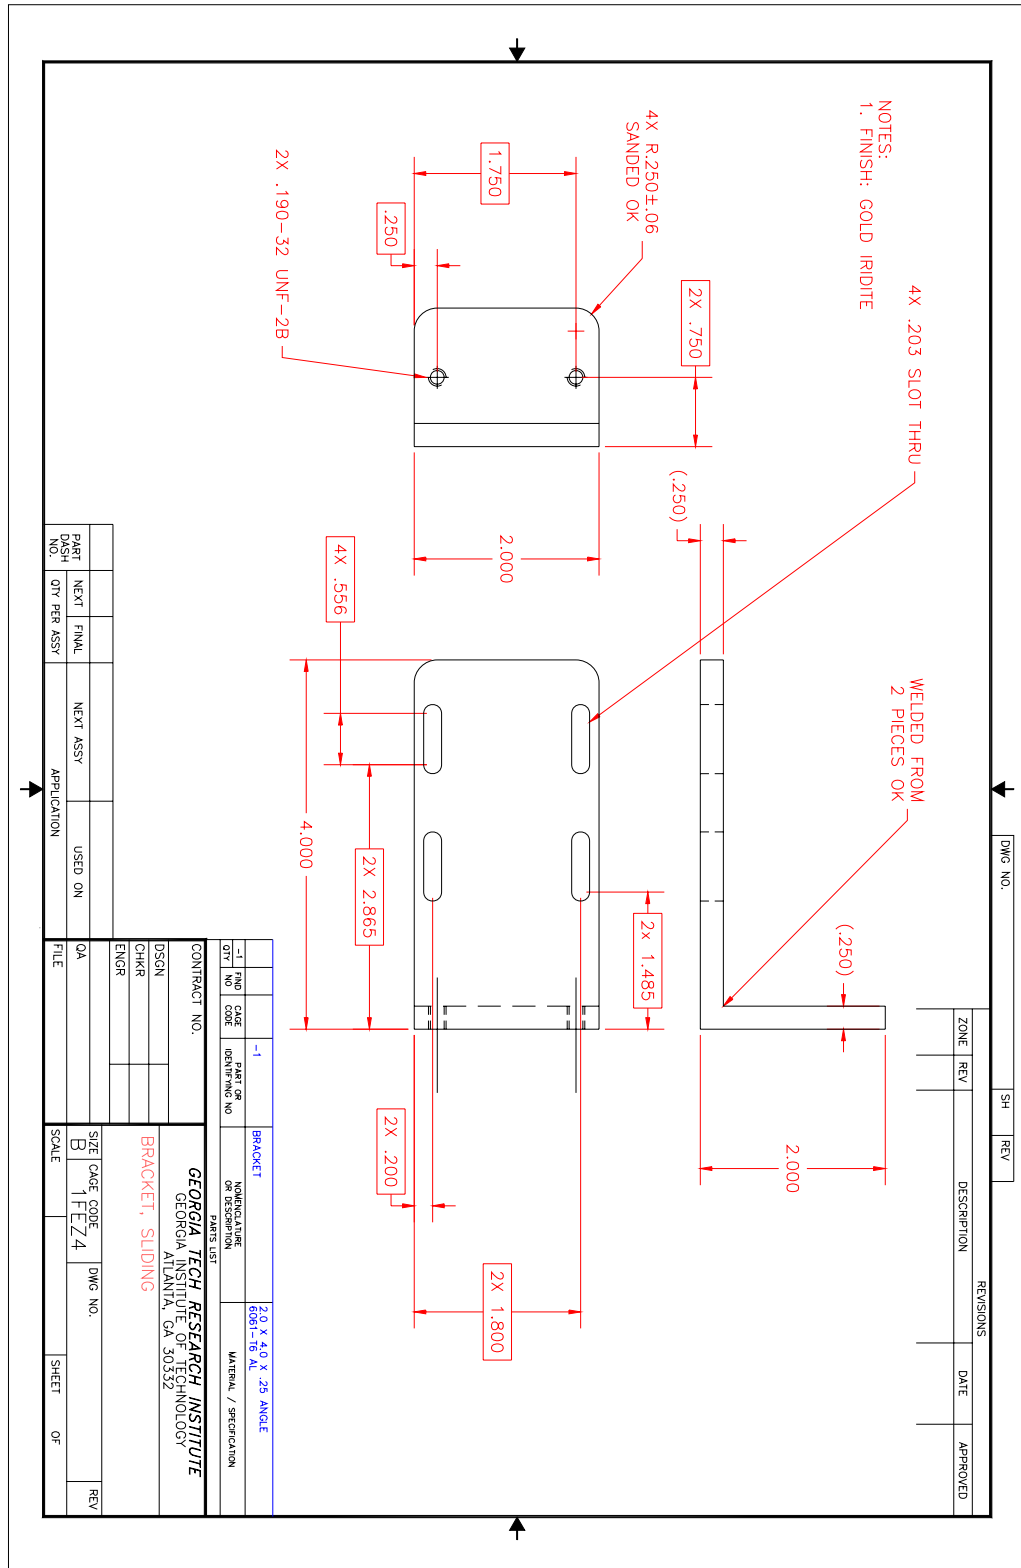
Jet Engine, Sliding Actuator Mounting Bracket
